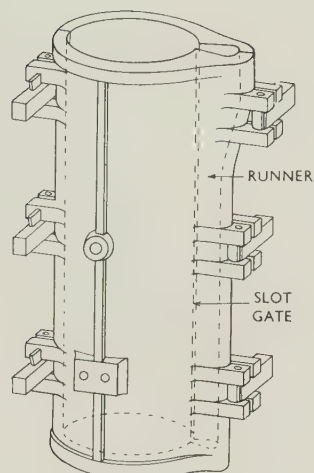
Typical Book Mould for Extrusion Billets in the "Classical" Alloys.
